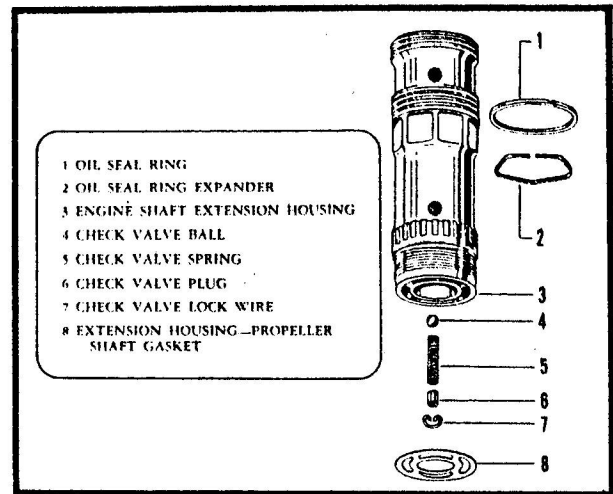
Engine Shaft Extension Assembly for Double-Acting Models 24E60, 23F60, and 24F60
